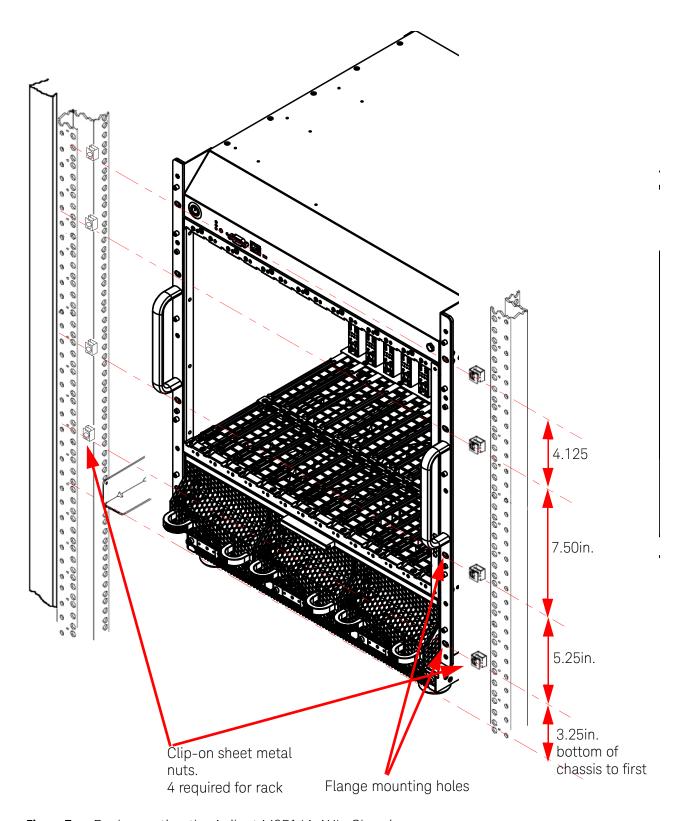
Rackmounting the Agilent M9514A AXIe Chassis
